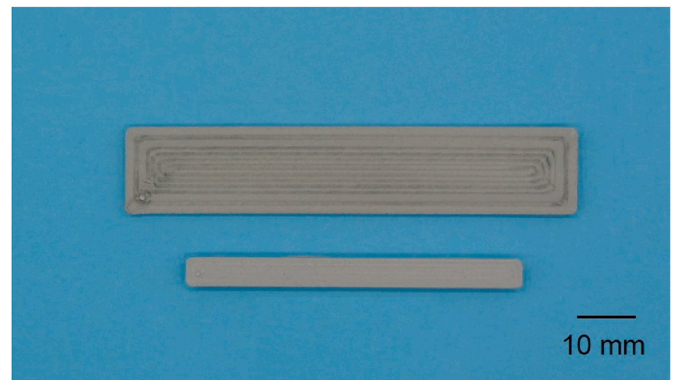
3D printed alumina samples using M.A.T. printer, initial printing parameters.
